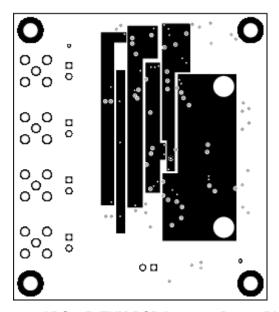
ADS7057EVM PCB Layer 3: Power Planes
